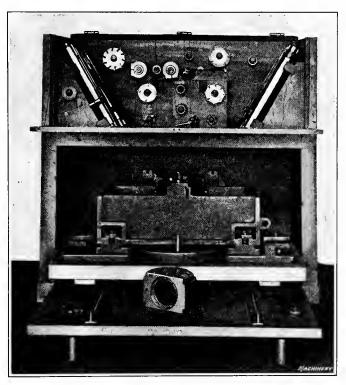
Portable Cabinet containing Jig and the Necessary Cutting Tools
